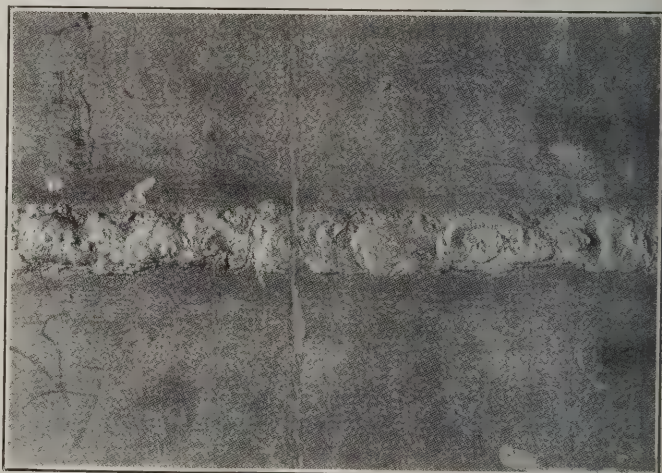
Photograph of Upper Surface of Arc Weld
